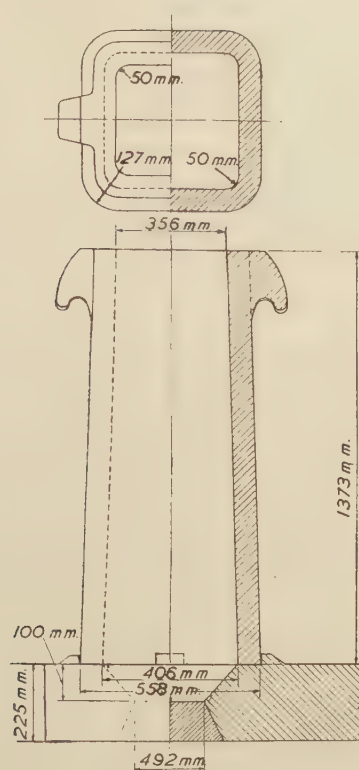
Standard 1.5-Metric-Ton Mould and Bottom Plate.
